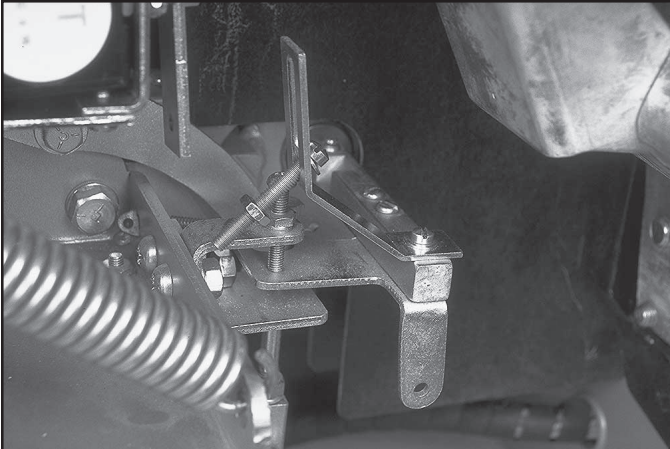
Trip Tab Assembly Mounted to the Trip Bar
